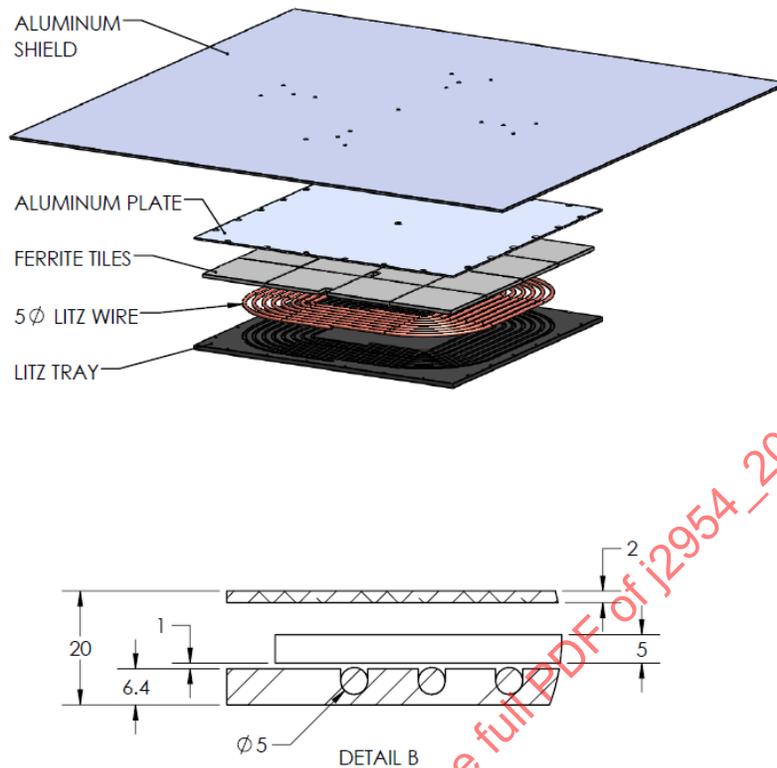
Exploded view of the Test Station VA WPT2/Z3
